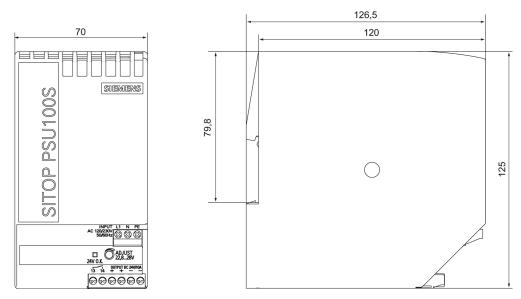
Dimension drawing 6EP1334-2BA20, 6EP1323-2BA00
